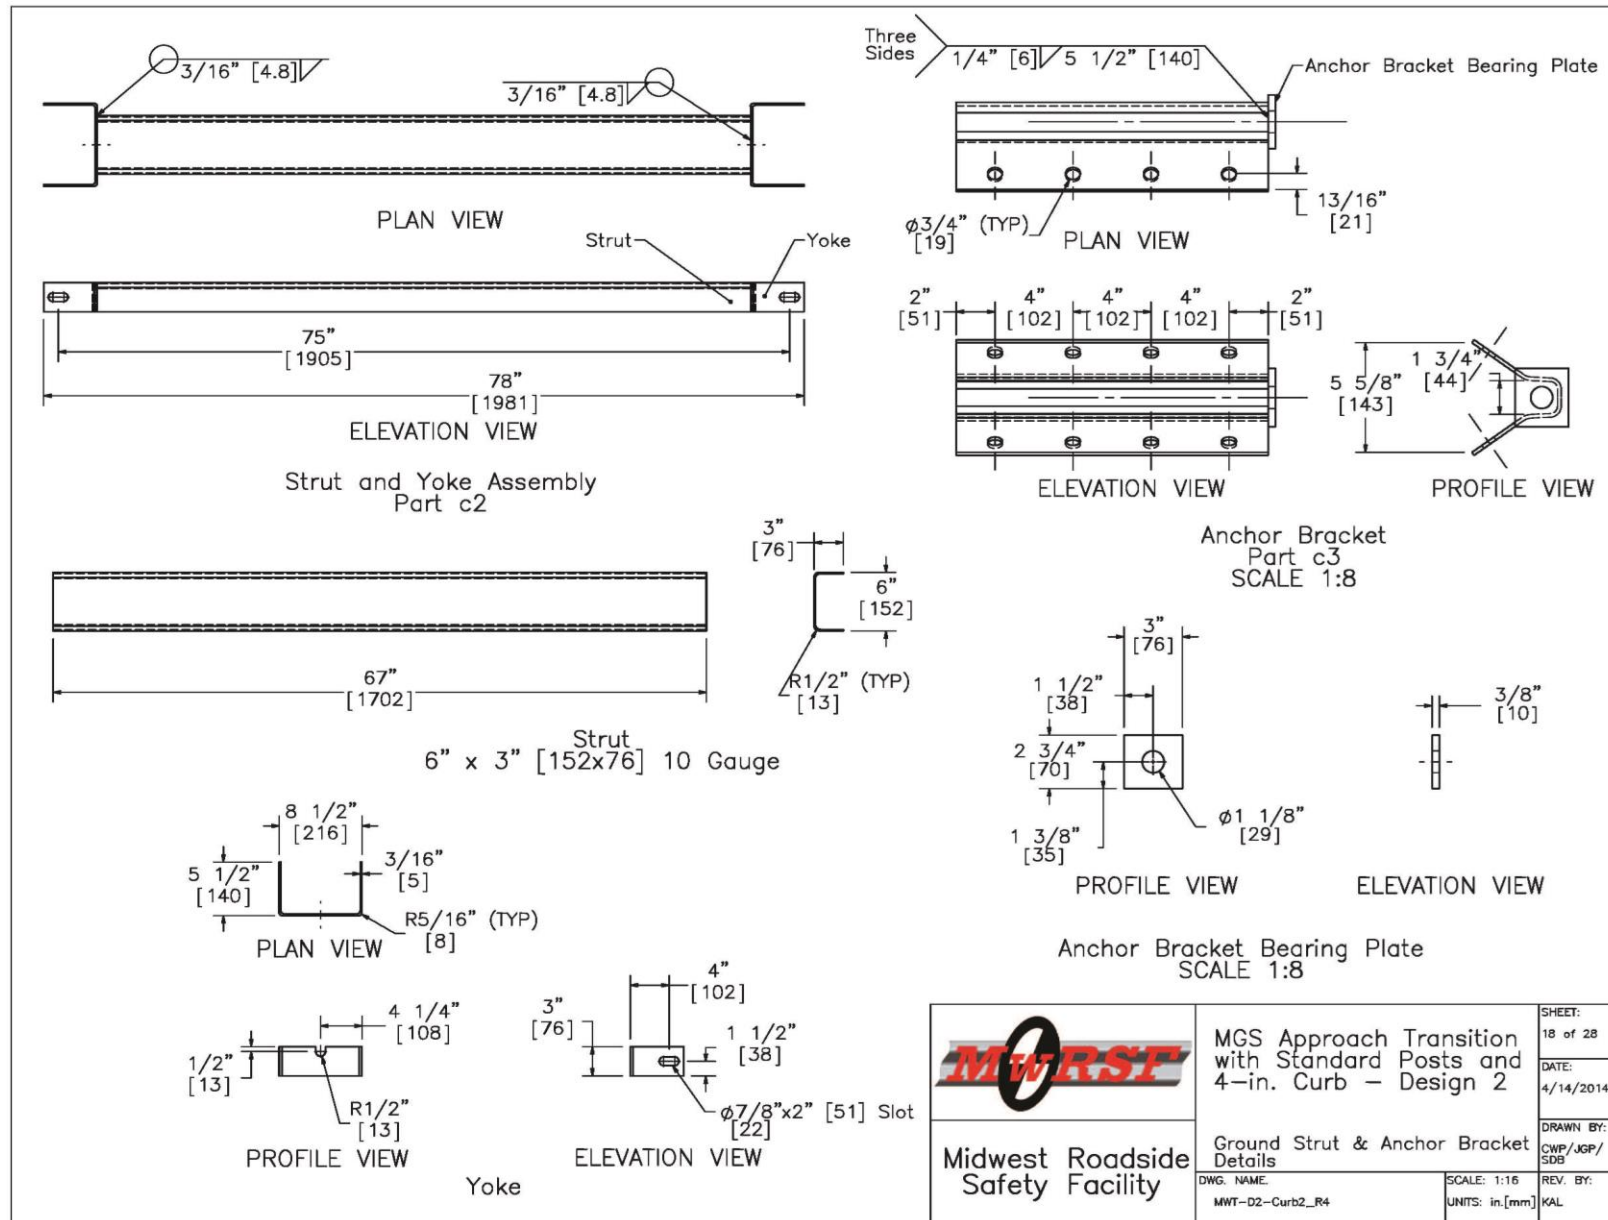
Ground Strut and Anchor Bracket Details, Test Nos. MWTC-2 and MWTC-3
